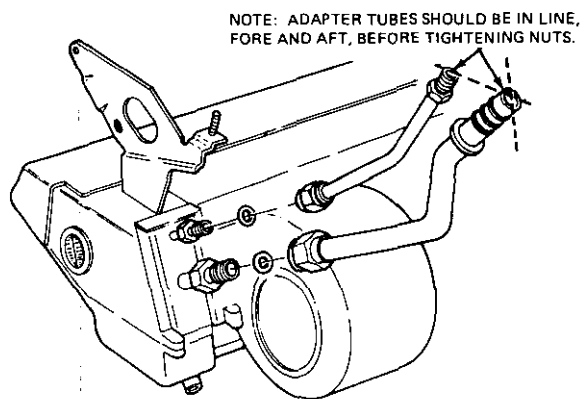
B-185 Evaporator Inlet and Outlet Pipes and O-Rings
